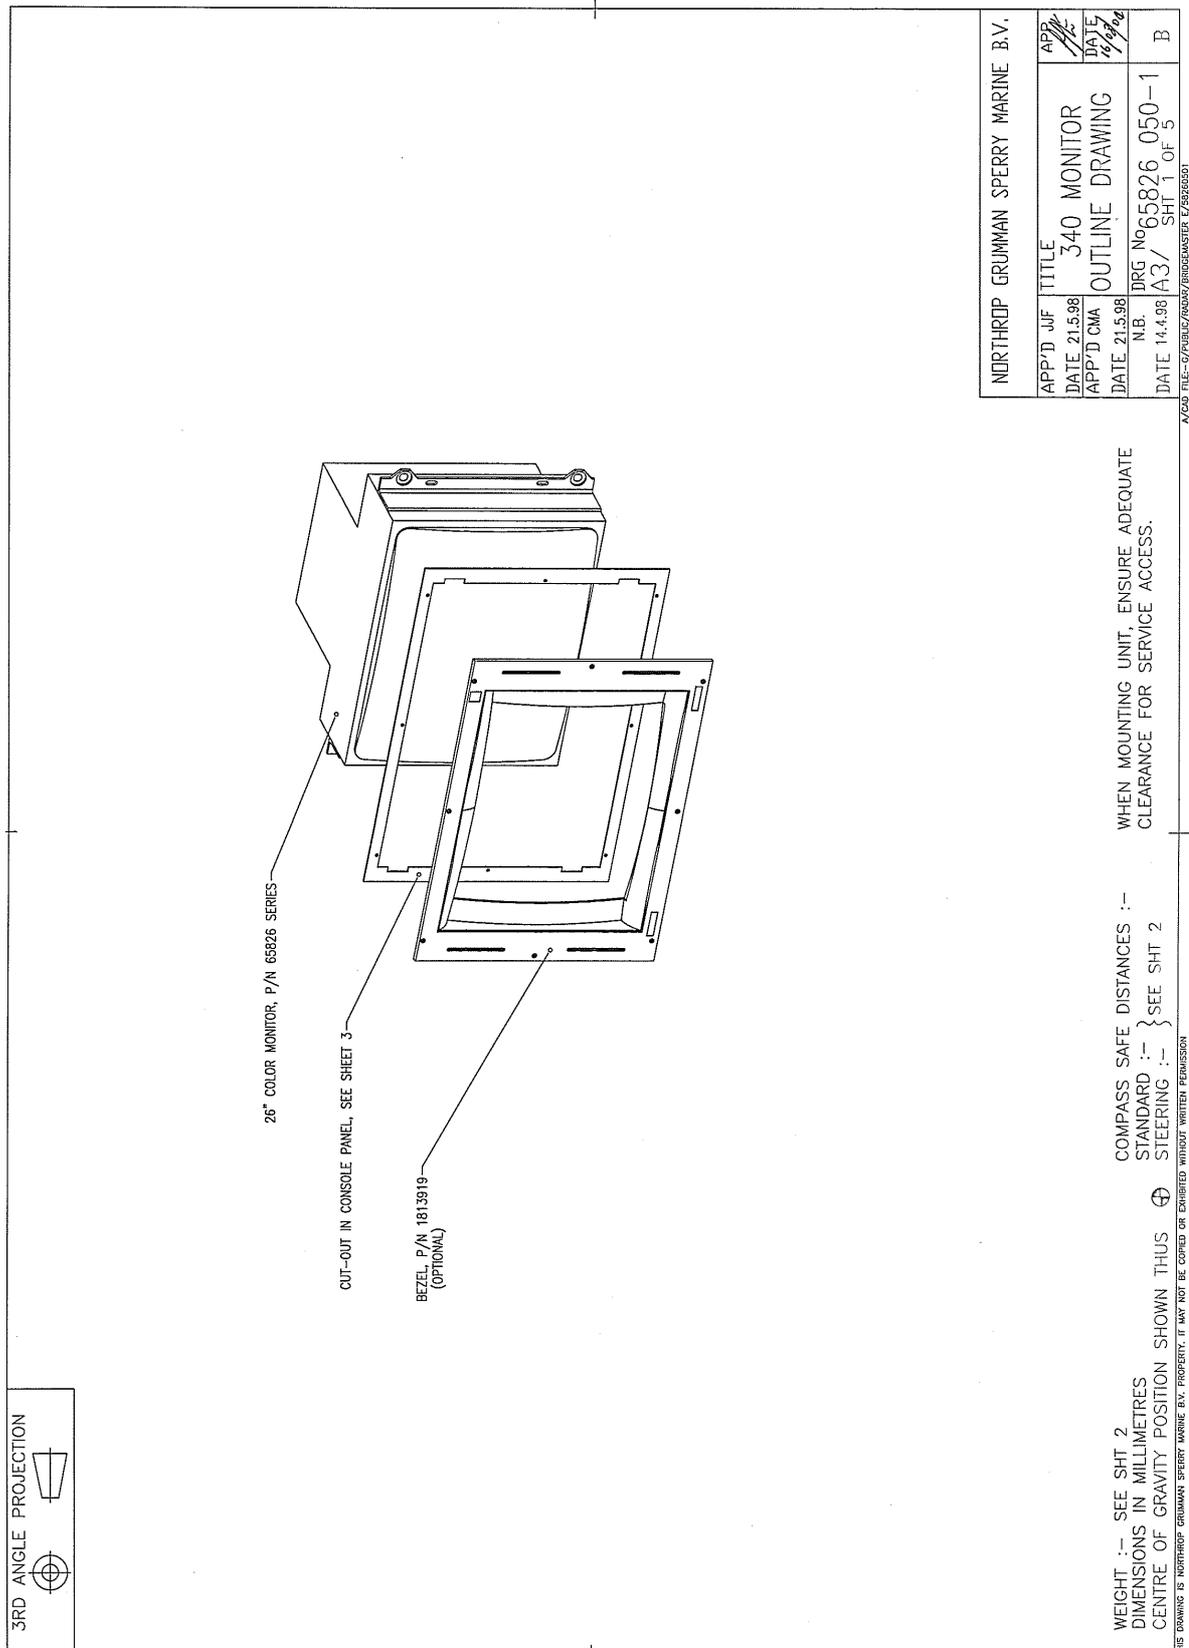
340 Monitor Module (CRT) Outline Drawing (Sheet 1 of 5)
